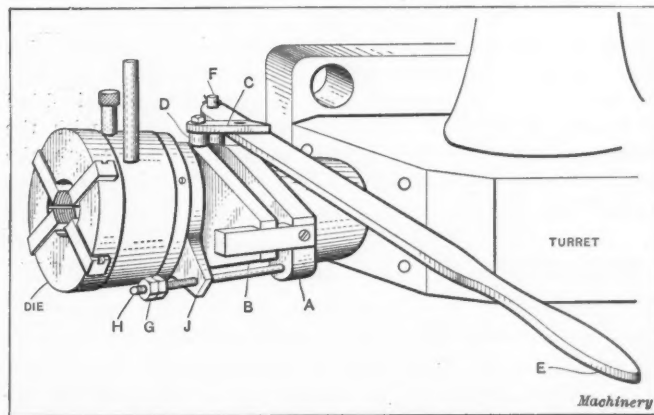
Turret Fixture for threading Work shown in Fig. 1
